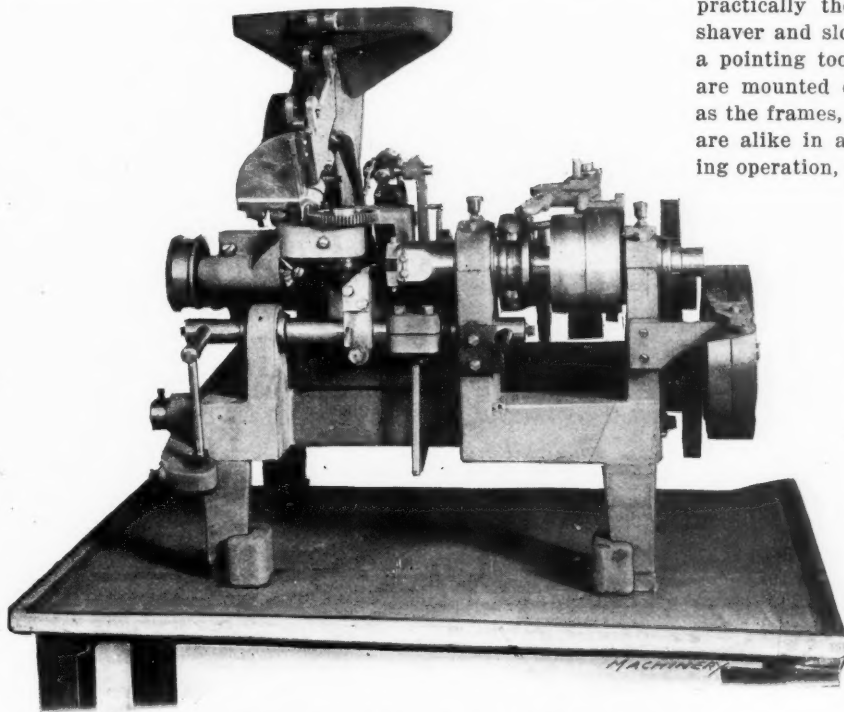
H. P. Townsend Screw Shaving and Slotting Machine
